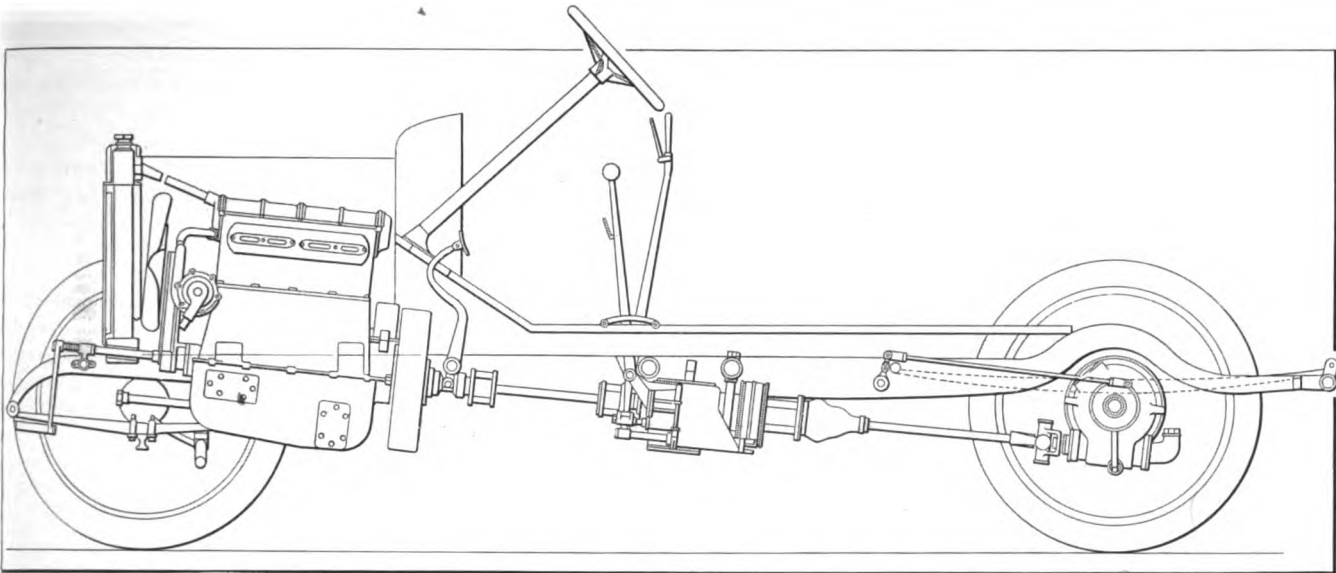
Side view of Knight Daimler chassis, showing straight line between engine, gear box and rear construction, worm drive and upswept frame
